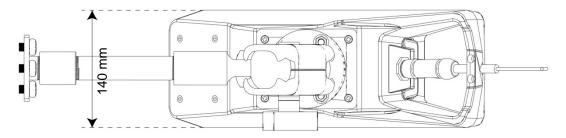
RAVEN-EYE® sensor dimensions top view as installed
